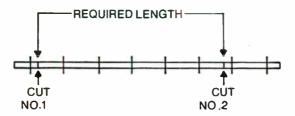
Avoid cutting at the spacers on the inner conductor. If necessary, move the measurement down the line and make a cut at both ends.
